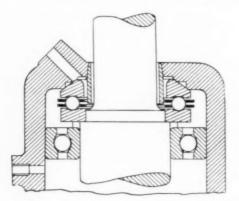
OILING ARRANGEMENT IN A FOOTSTEP BALL BEARING
